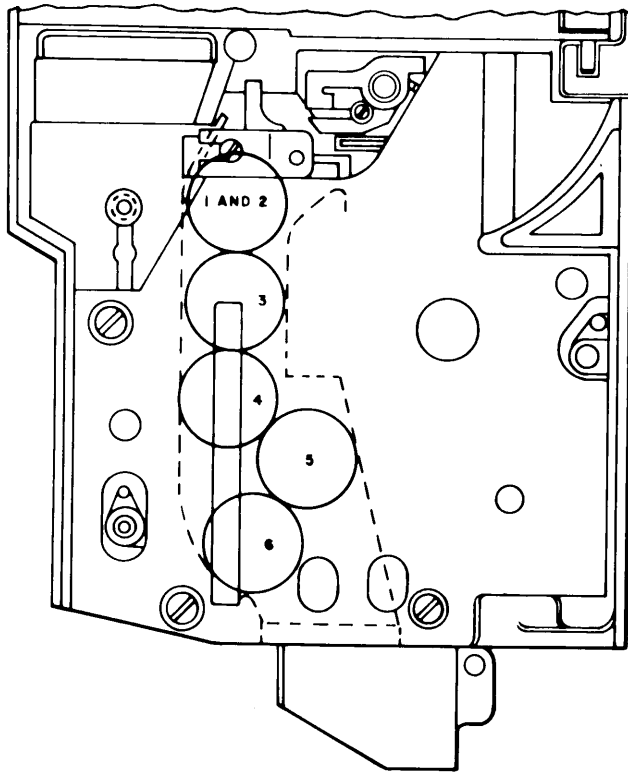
Lower Portion of Coin Chute With Six Dimes Jammed
